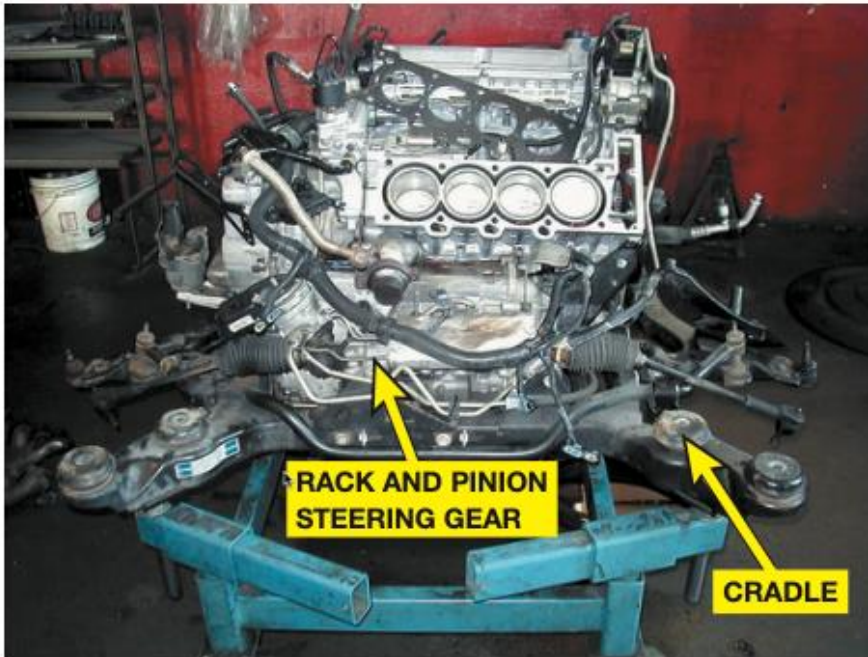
The complete front-wheel-drive assembly lowered onto a special rack.
